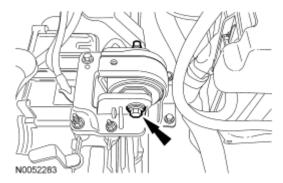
Identifying Transaxle Support Insulator Bolt Courtesy of FORD MOTOR CO.
